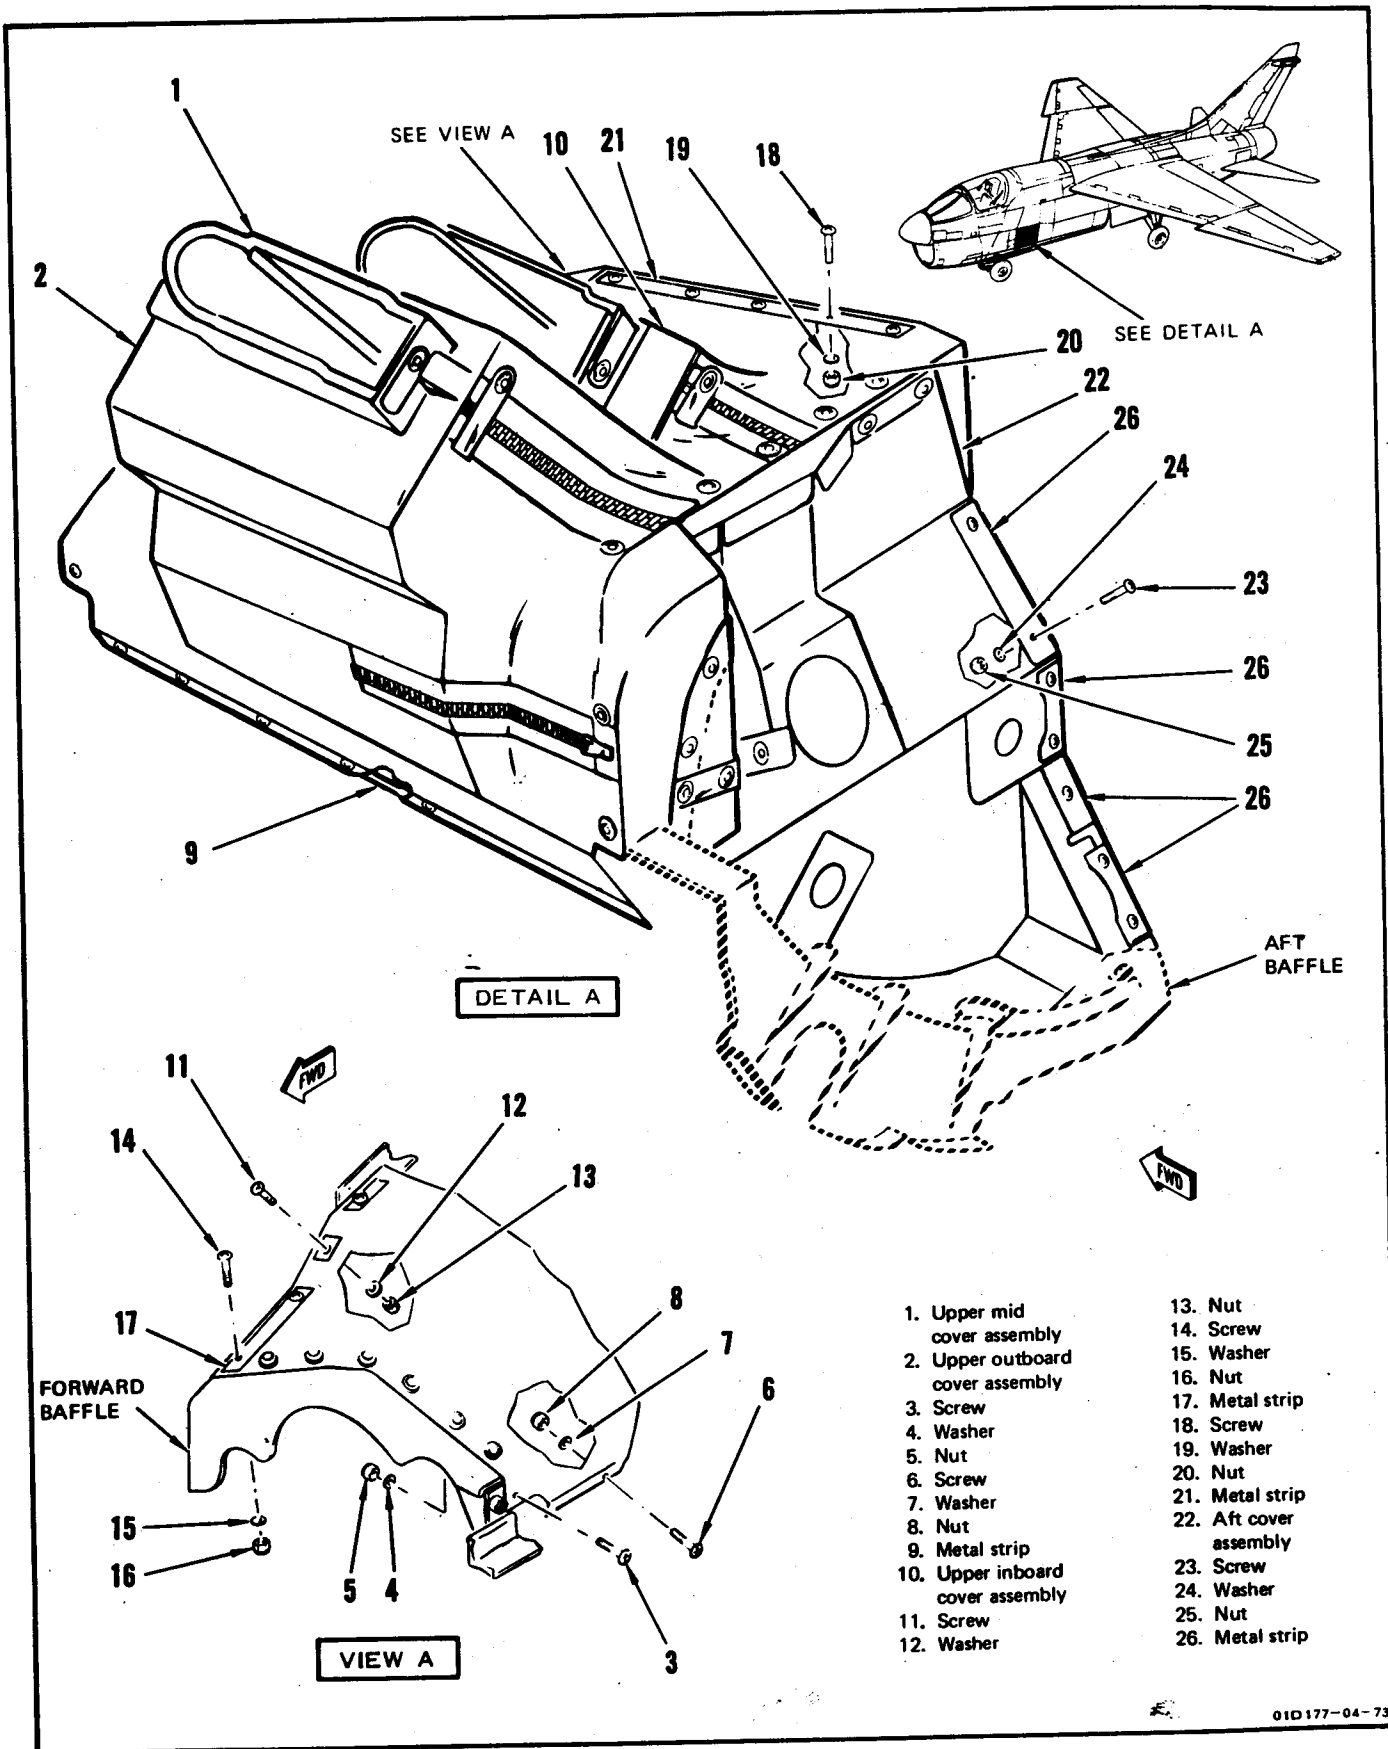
Gun Gas Purge Shroud Removal and Installation
